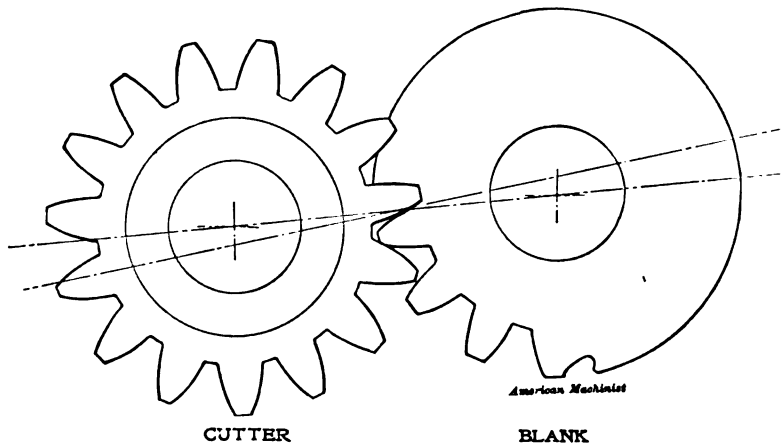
Fellows Gear-cutter and Partially Developed Gear.
